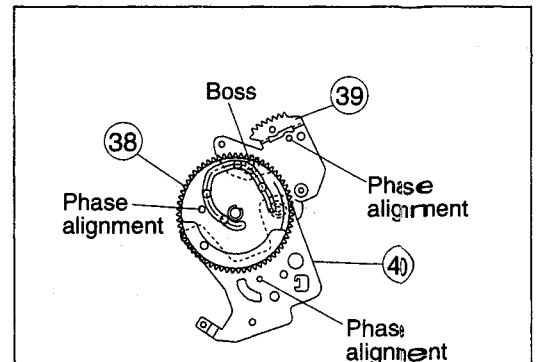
(b) Removing the Clutch Lock Lever Assembly ④⑩
